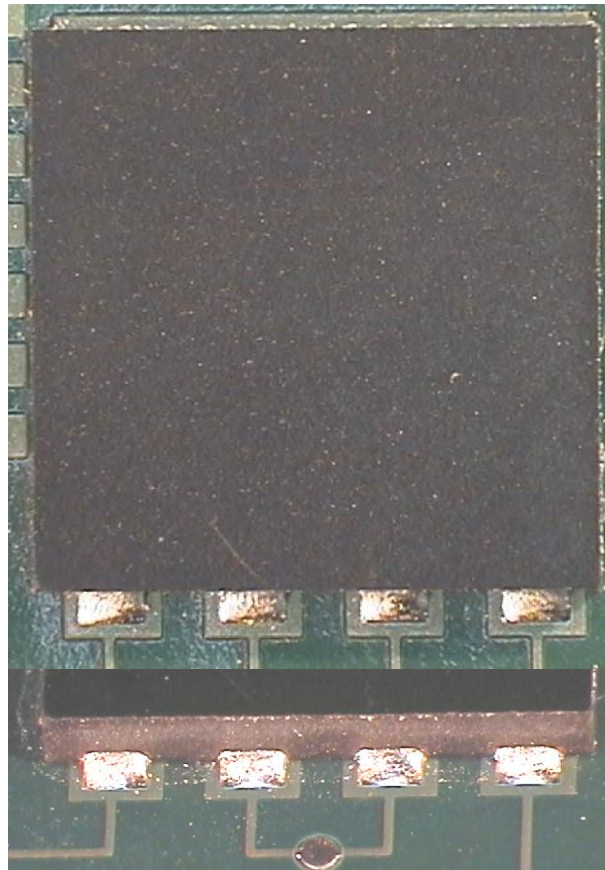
Typical optical photos of VDSO soldered on a PCB. The left photos shows an overview. Solder joints of gate and source can be seen on the right side. The drain pad solder joint is fully covered by the package body.
